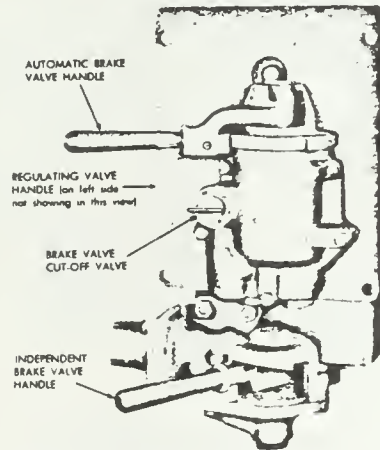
26-C AUTOMATIC BRAKE VALVE
